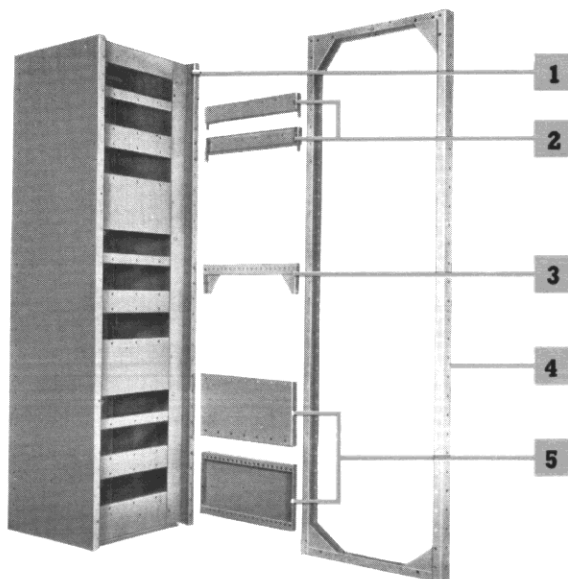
Standard housing parts for a Type DB-50 breaker unit. Parts are: (1) breaker cell structure, (2) rear frame, (3) bus support member, (4) rear frame and (5) bottom members
